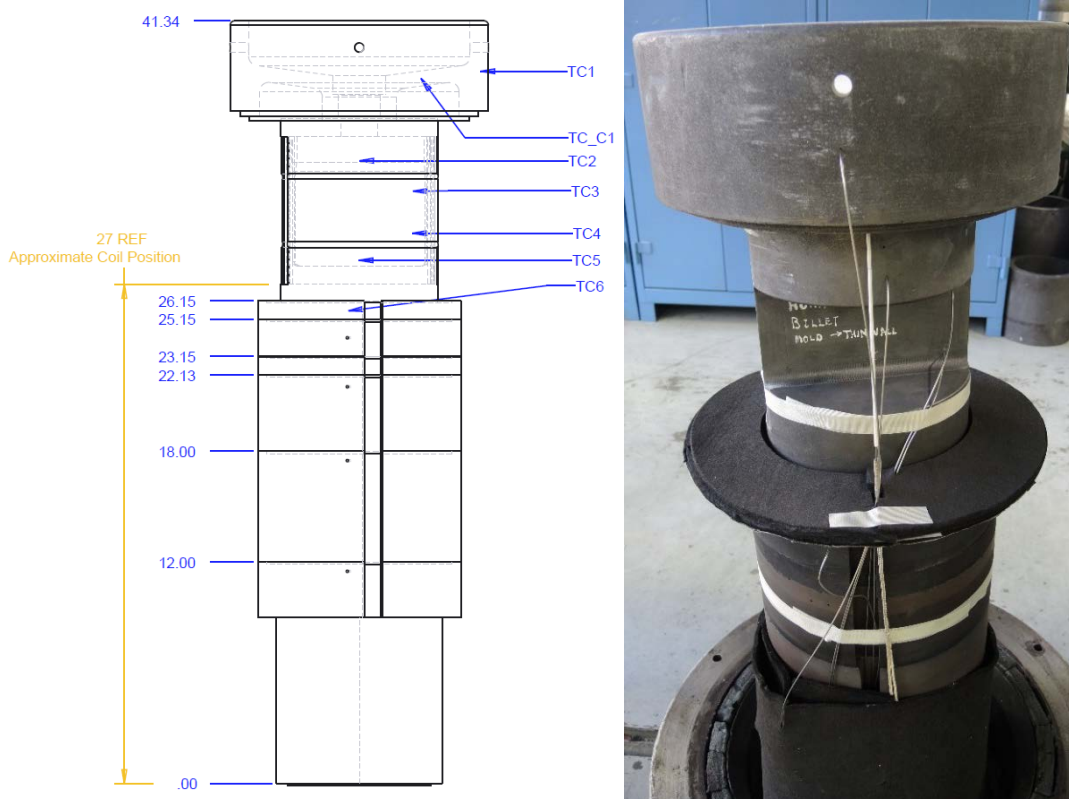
Pictures of the mold stack assembly and charge material configuration. Note that TC1 and TC_C1 are rotated 90 degrees on the drawing for ease of viewing. Crucible covers are not shown in the drawing or picture. The drawing omits the 2 layers of felt and 1 layer of mica that are used to prevent radiative heating of the lower portion of the stack.
